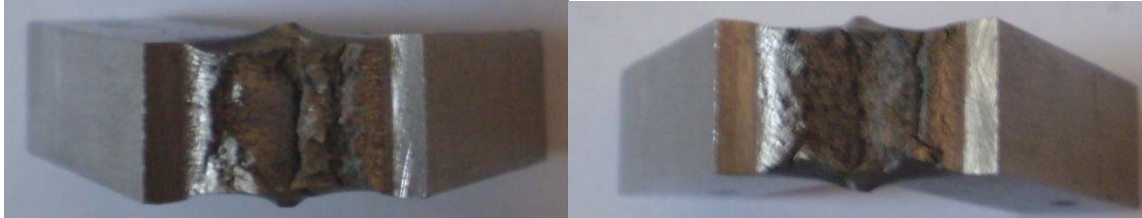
Appearance of fracture surfaces of the specimen for impact testing
